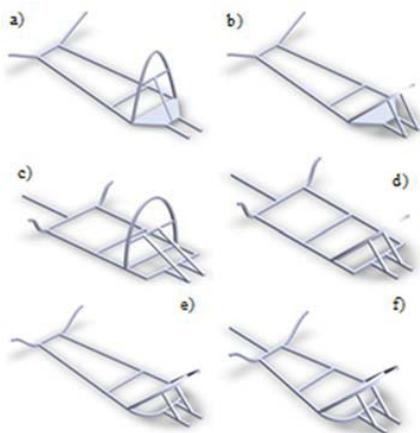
Isometric view of chassis design; (a) Design 1; (b) Design 2; (c) Design 3; (d) Design 4; (e) Design 5; (f) Design 6
